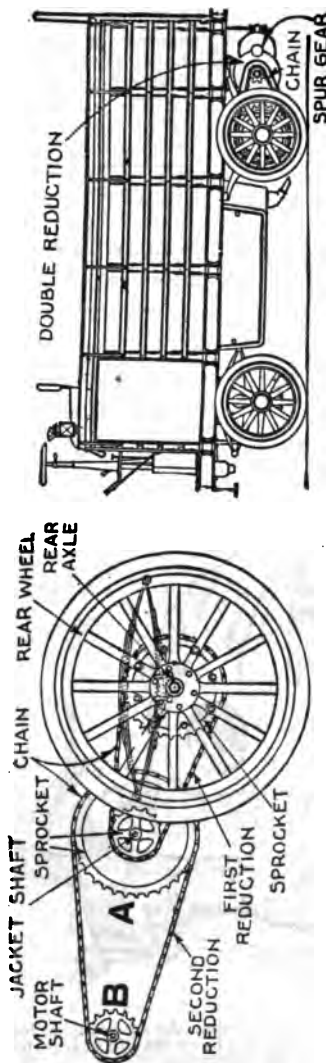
,057.—Double chain drive. The rear axle is of the "dead" type and each rear wheel has a sprocket with which the chains mesh. The jack shaft is parallel to the rear axle and upon the maintenance of parallelism between the two axles depends the satisfactory working of the chain. The cut illustrates single and double reduction chain drive. For single reduction the motor would be located at A, and for double reduction, at B.
